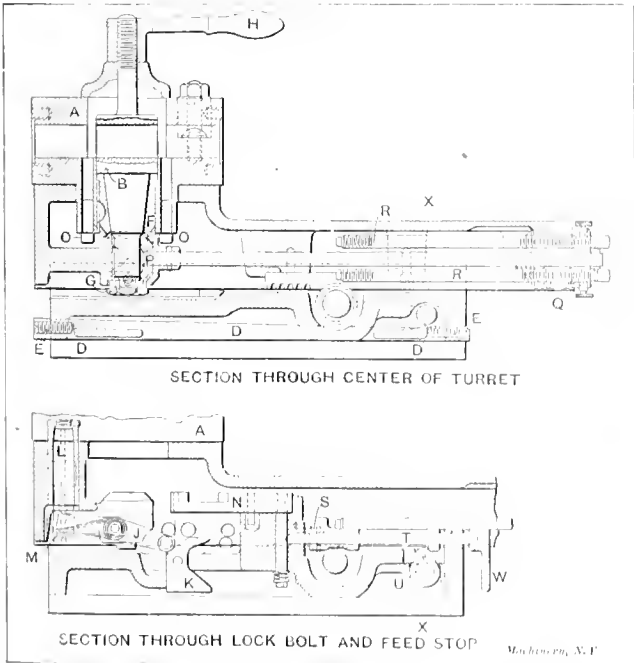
Longitudinal Sections, showing Turret Indexing and Feed Mechanisms
